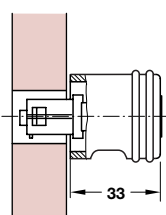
mm fixed or lock handle with 4.2 mm cover plate
